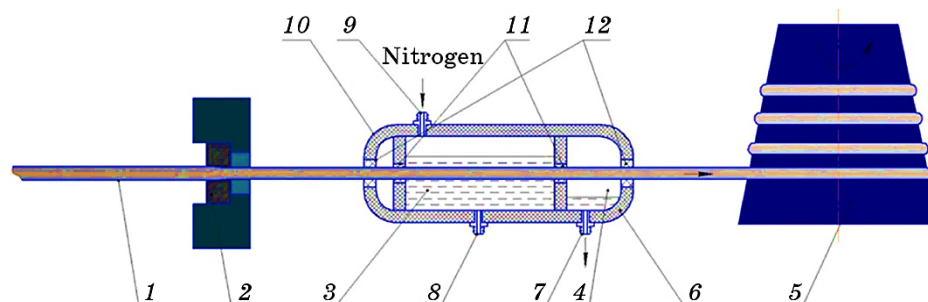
Installation diagram for thermomechanical wire processing: 1 is wire, 2 is lugs in a fibre holder, 3 is cryogenic cooling chamber, 4 is chamber for collecting excess nitrogen, 5 is drum of the drawing mill, 6 is thermal insulation layer, 7 is removal of liquid nitrogen residues, 8 is nitrogen pumping, 9 is liquid nitrogen supply, 10 is cryogenic installation, 11 is fine seals, 12 is sealing seals for coarse cleaning.
